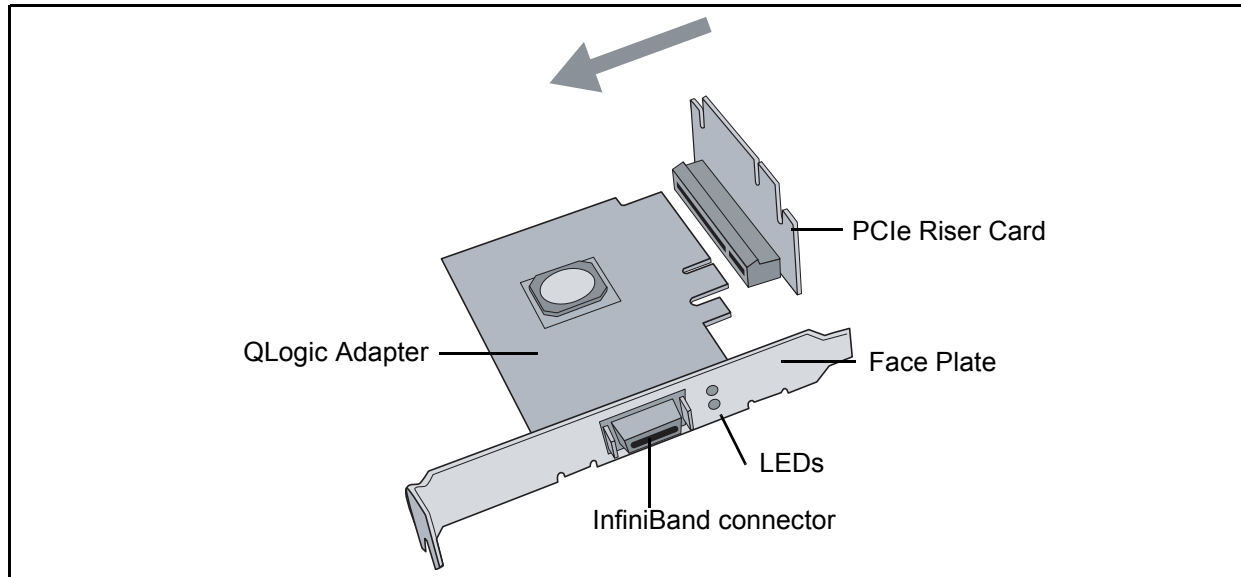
QLogic PCIe Host Channel Adapter Assembly with Riser Card
